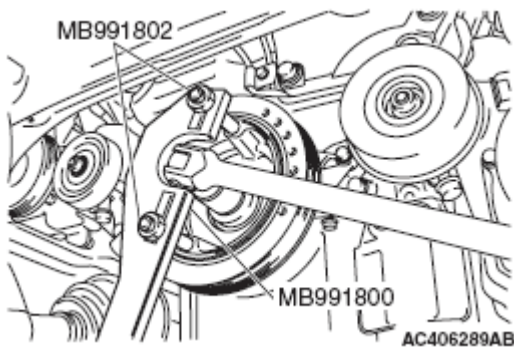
Removing Crankshaft Pulley Bolt Using Special Tools MB991800 And MB991802
